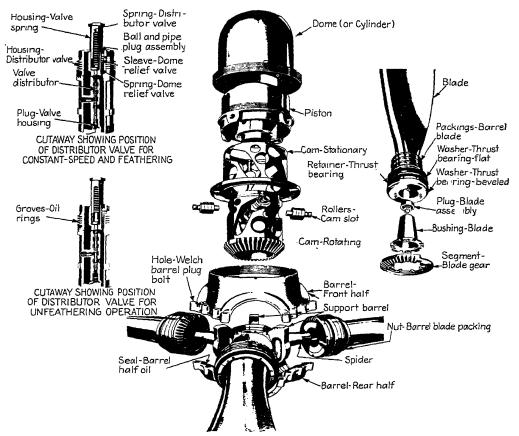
Expanded view of a Hamilton Standard hydromatic propeller.
